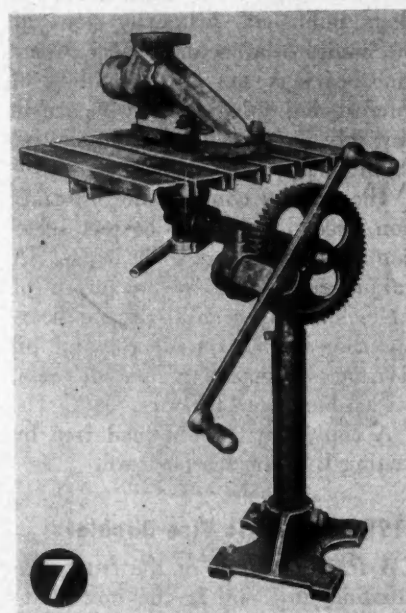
This shows how one of the end pieces of manifold in Fig. 6 was set up
